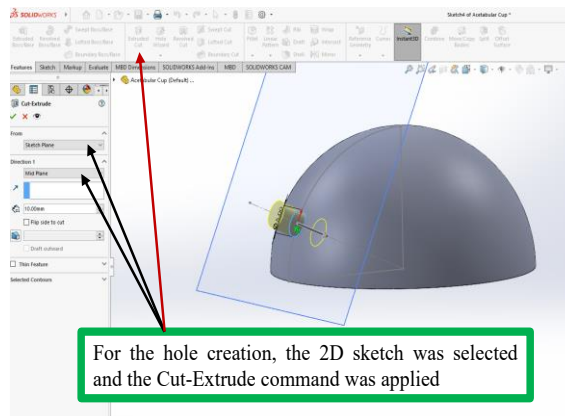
Creating 3D holes on the surface of the Acetabular Cup solid model
